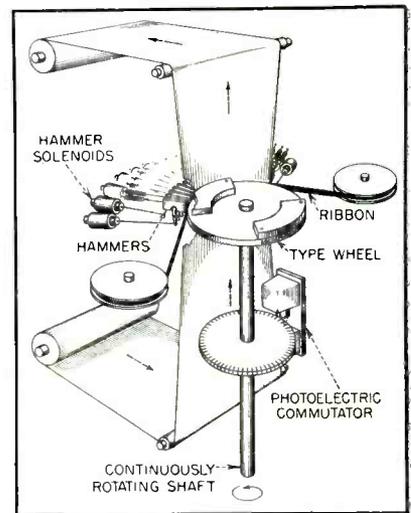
Artist's drawing of printer shows positions of type wheel and printing hammers. Photoelectric pulse generator disk is beneath type wheel
